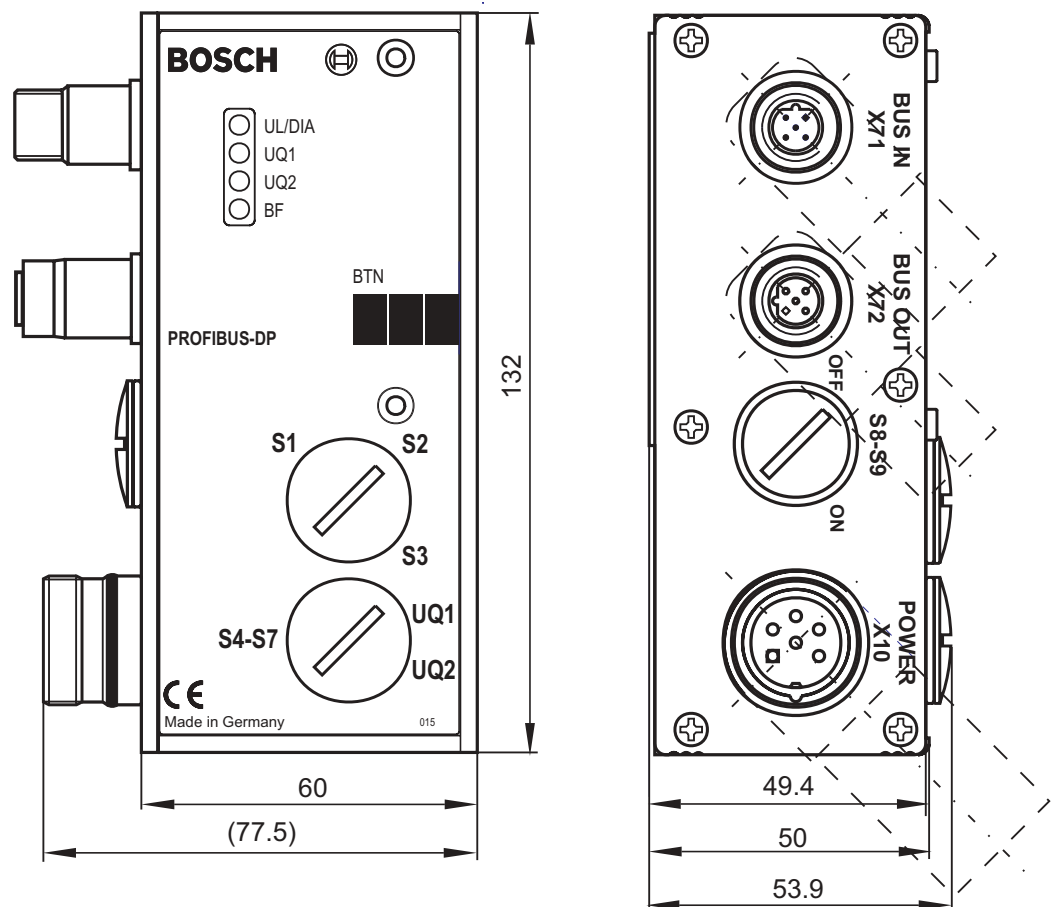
PROFIBUS-DP bus module RMVDP/F dimensioned drawing
